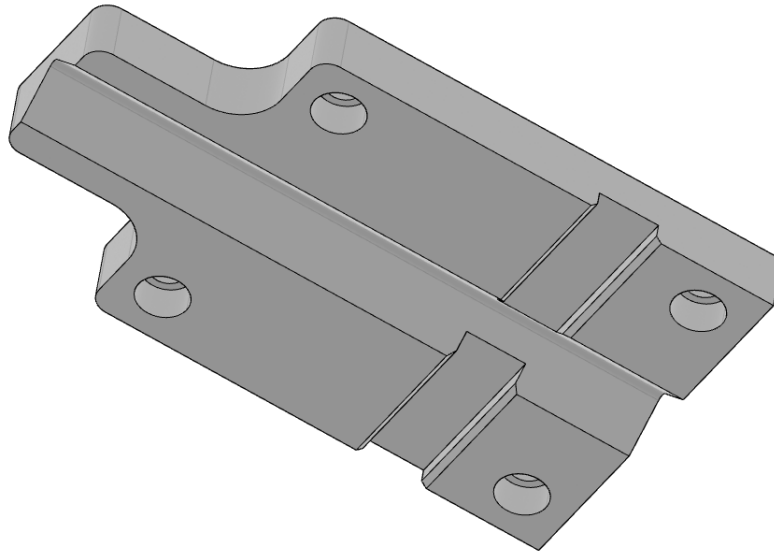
Concept 3 further developed. The plate have the dimensions 400x200x35mm
